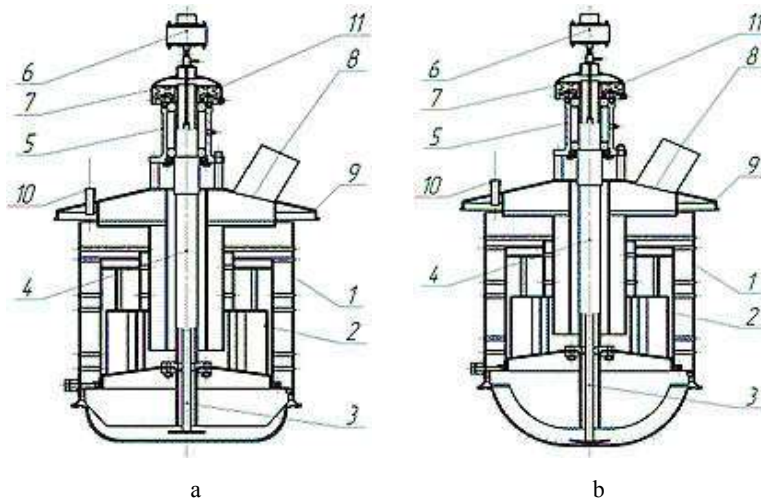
RVP design: a – toroidal shaped basket bottom; b – spherical shaped basket bottom; 1 – basket with perforated bottom; 2 – distributor; 3 – a rod with spraying element, 4 – shaft; 5 – bearing; 6 – oscillator; 7 – metal cap; 8 – nozzle for melt supply before start-up of the vibropriller; 9 – upper casing half; 10 – nozzle for steam supply before shut-down of the vibropriller; 11 – pulley
